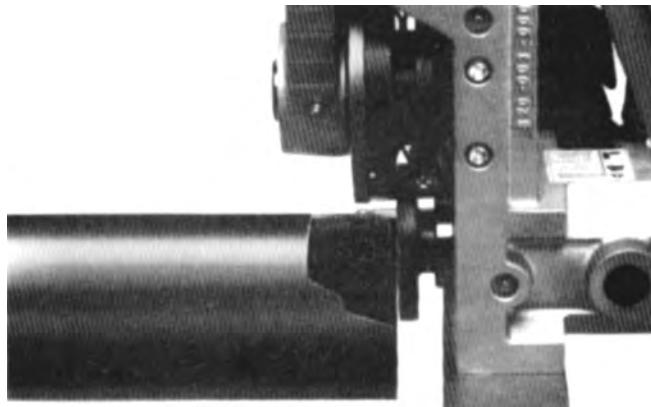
Squaring Pipe up against Flange of Drive Roll
